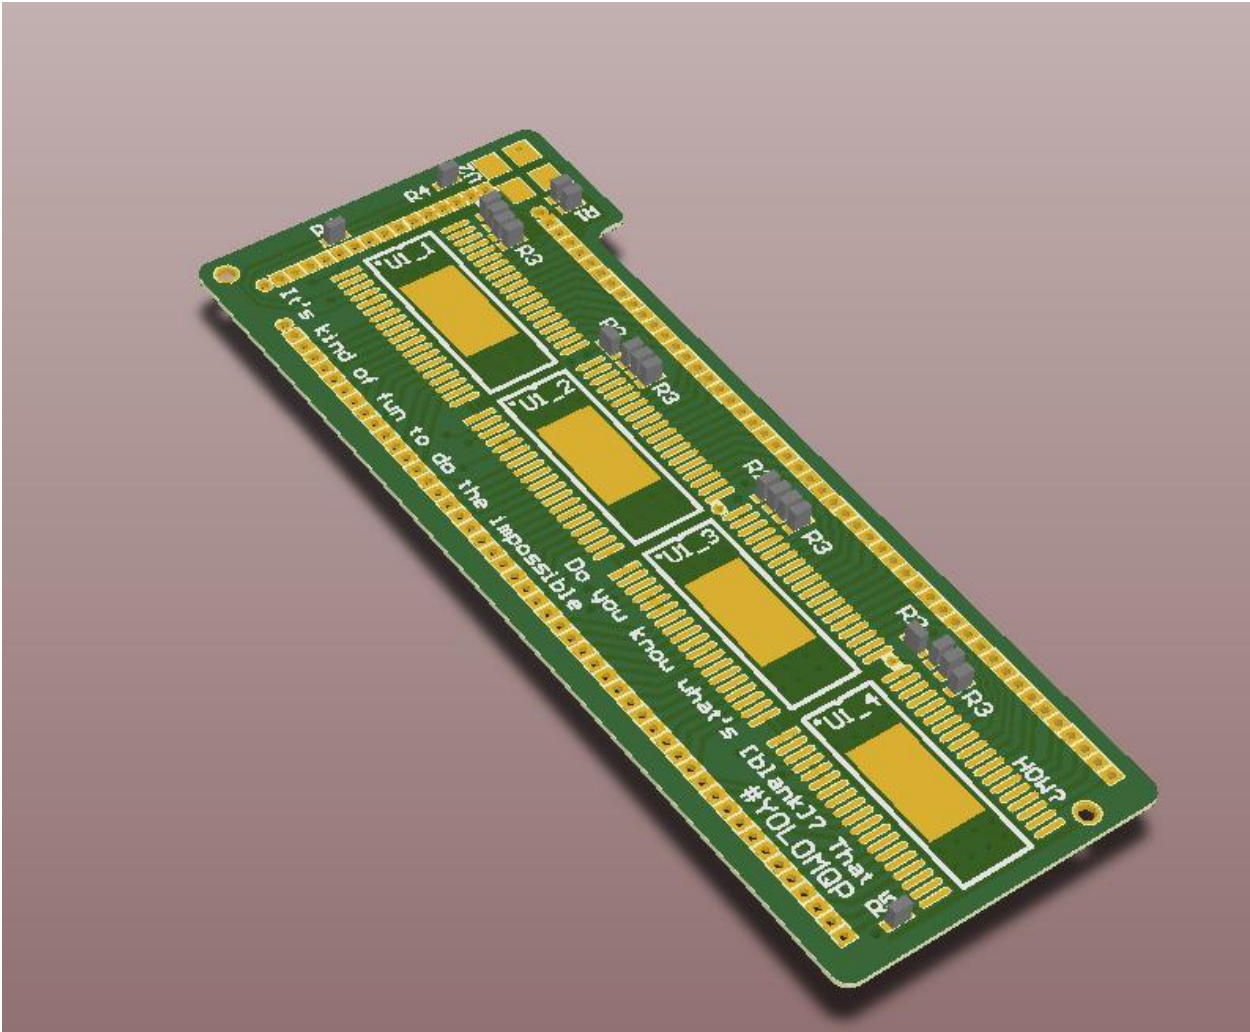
Direct Drive Daughterboard Bottom Soldermask
